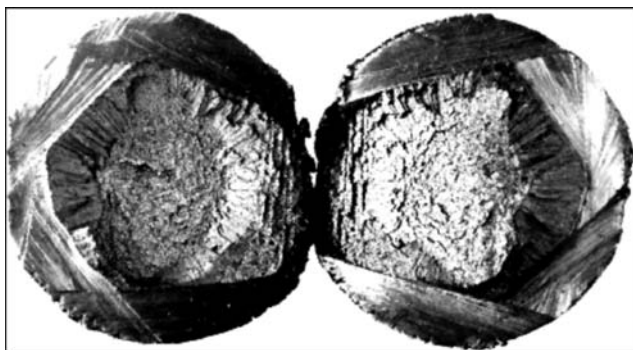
Appearance of rod MIAB welded joint fracture after mechanical testing with a notch in the welding plane
